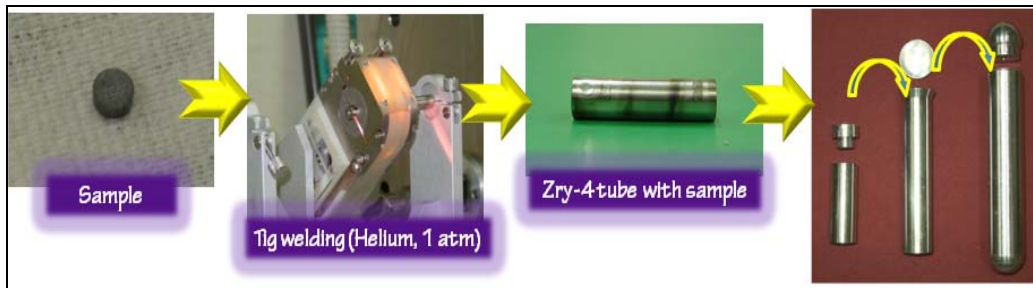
Sample container (welding) for irradiation.
